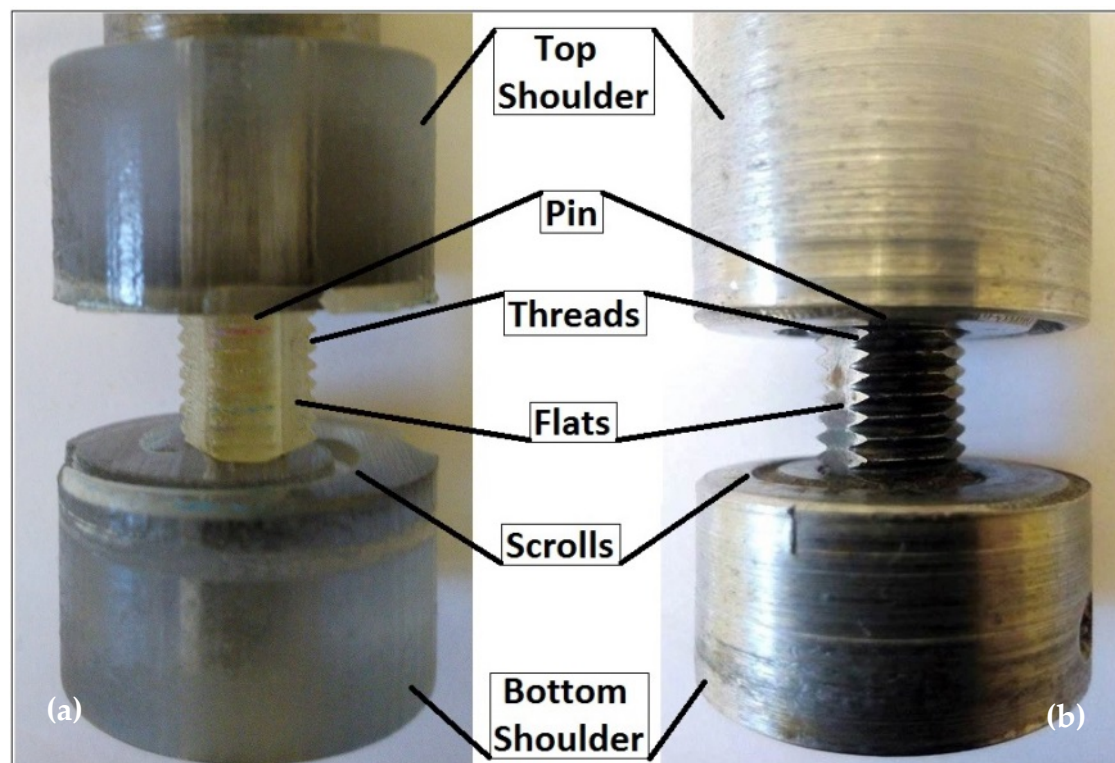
The apparent geometry features of the bobbin tools used for the analogue and aluminum welds; (a) 3D-printed plastic tool utilized for the plasticine analogue, (b) H13 steel tool for the aluminum welding.
